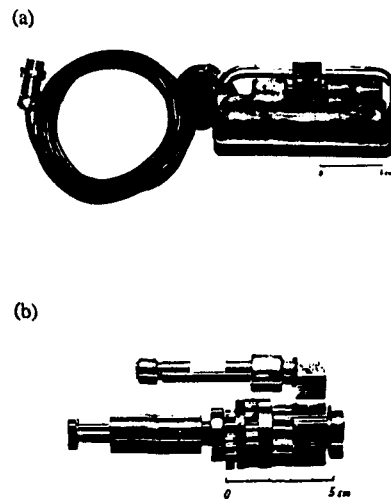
Pictures of (a) the total actuator assembly, and (b) the mechanical parts for reduction of rotation
